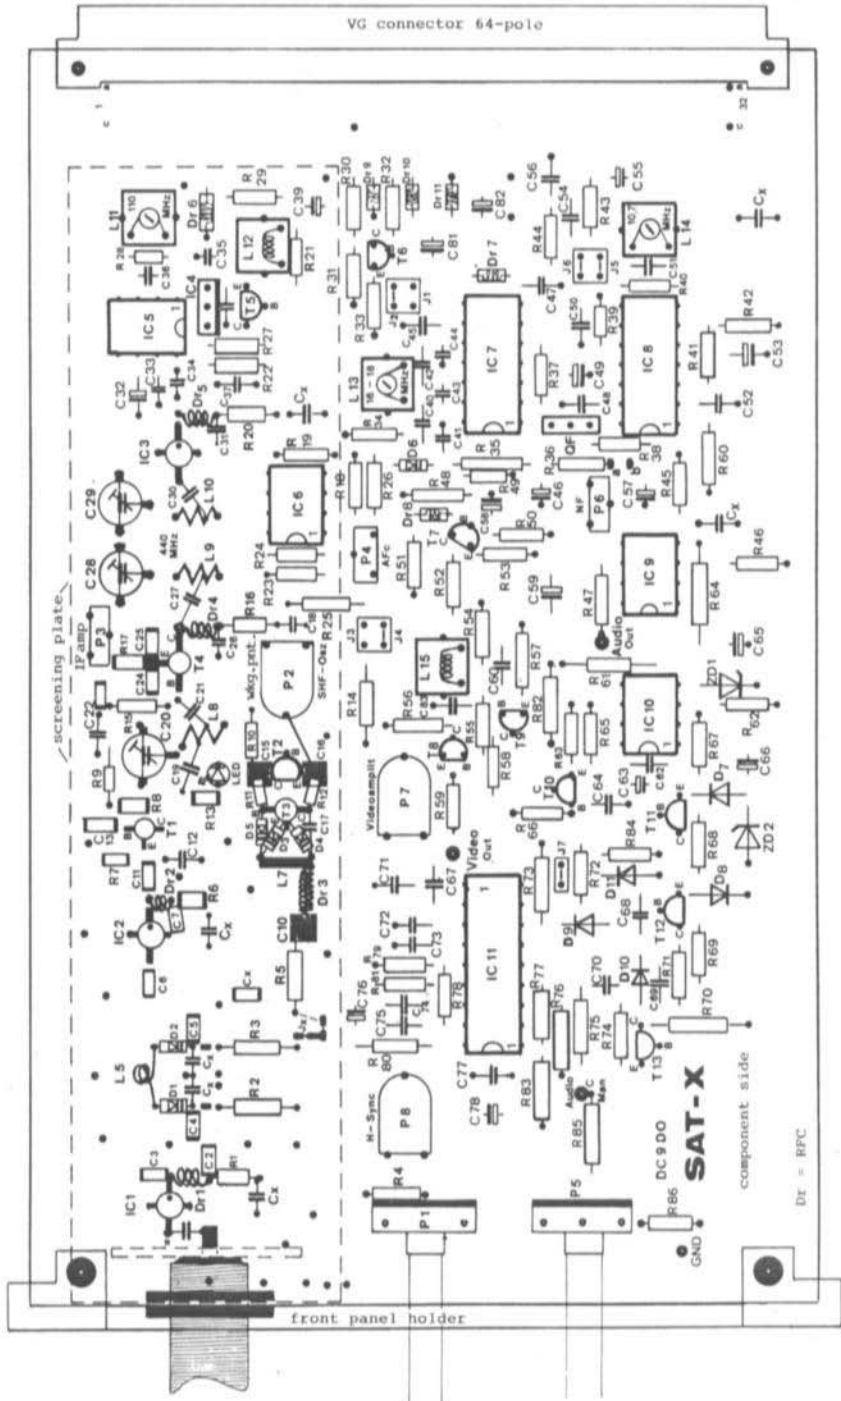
SAT-X Eurocard, double-sided PCB, component layout plan
